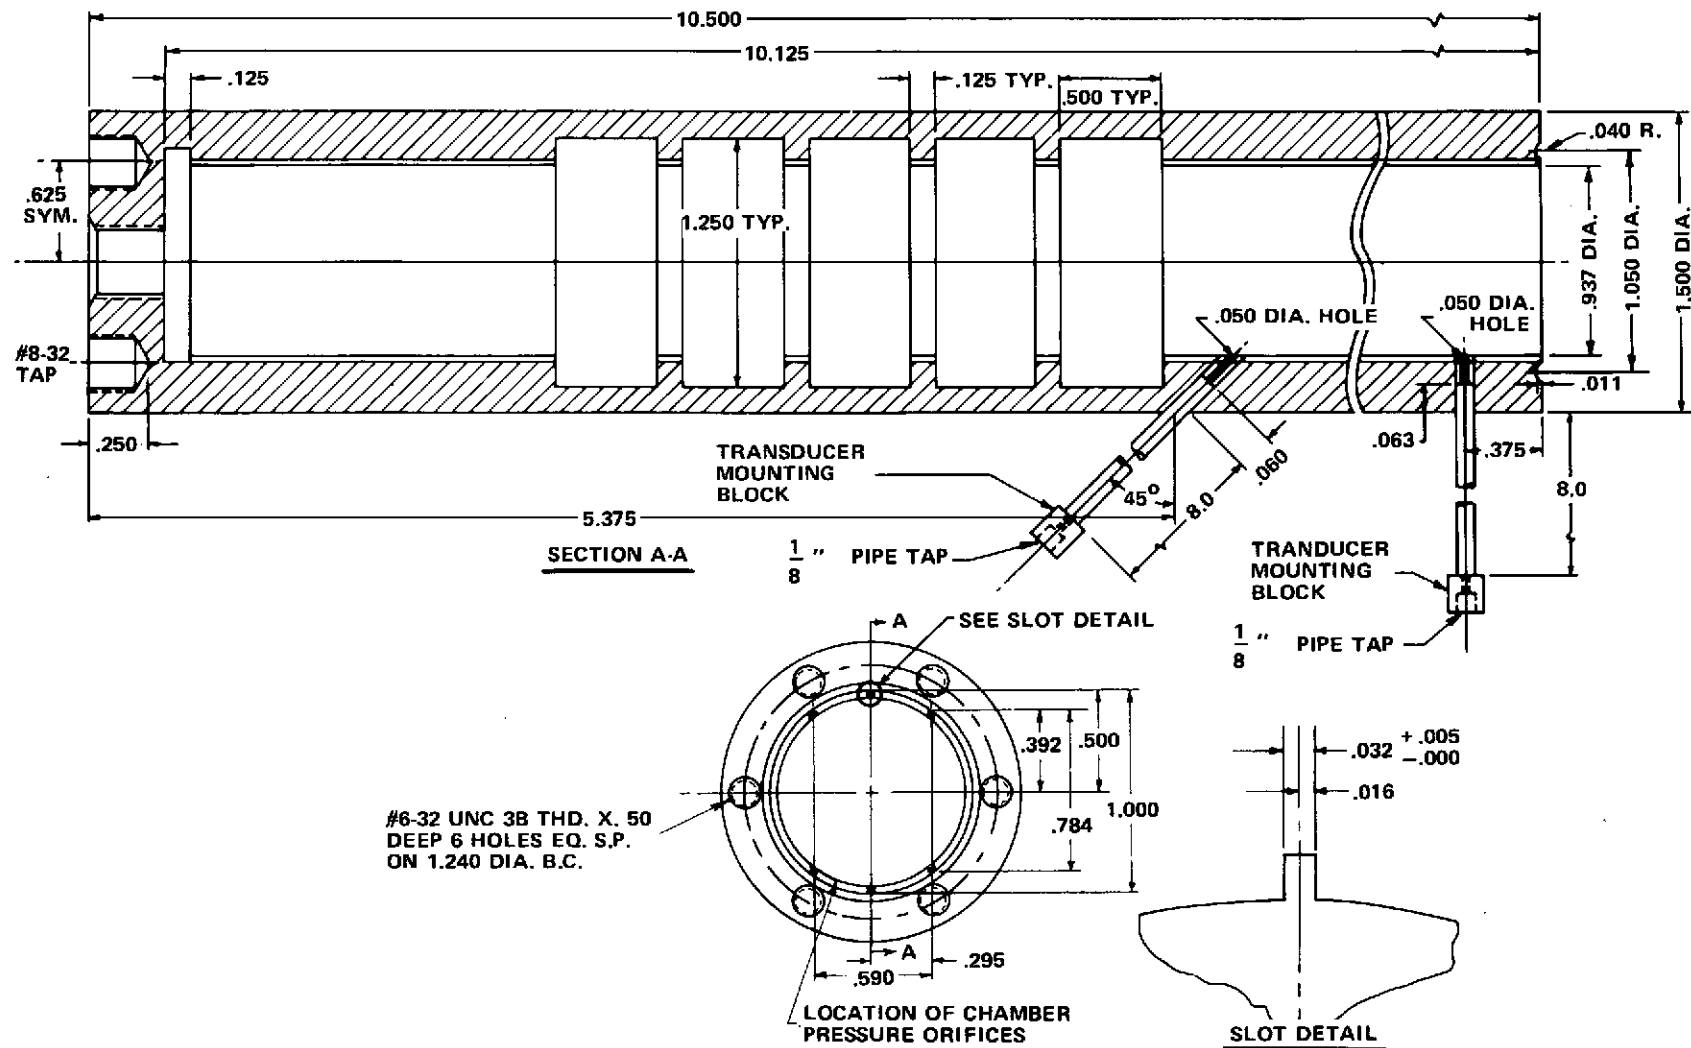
SOLID ROCKET MOTOR COMBUSTION CHAMBER DETAILS
